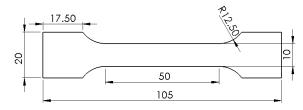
Dimensions of the tensile test sample for the uniaxial tensile test experiments, (dimensions are in mm)
